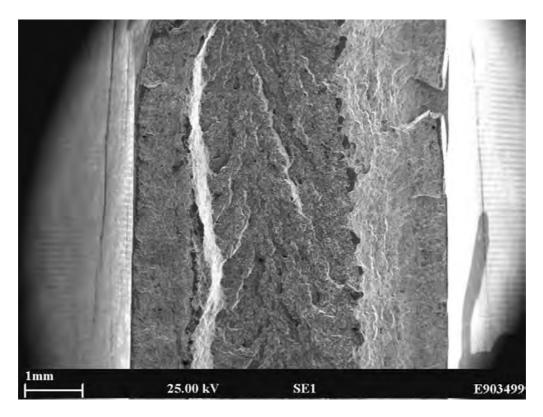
SEM fractograph, showing a typical cylinder block fracture surface field and one characterised by fast fracture "chevron" type markings.
